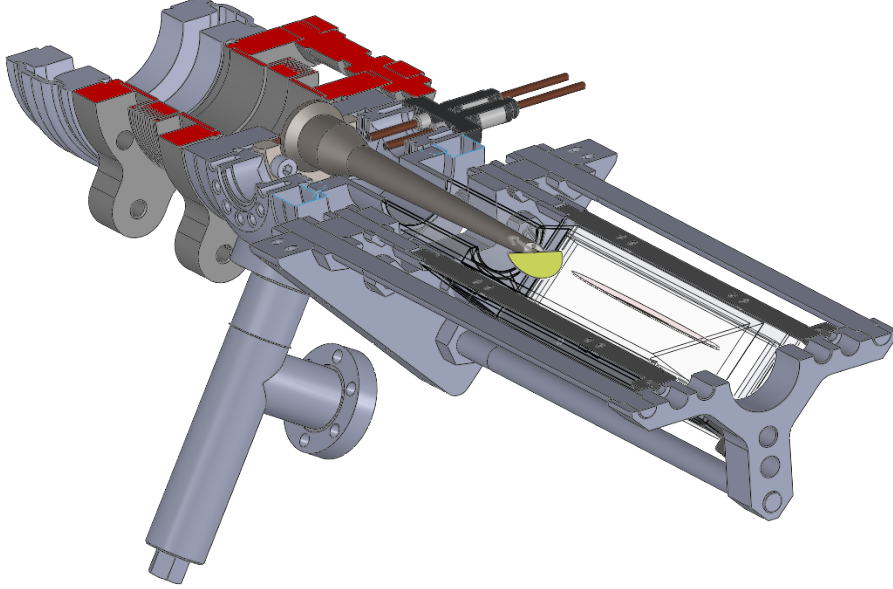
The 2D-MOT vacuum assembly: A cross-section of the 2D-MOT vacuum assembly, showing (from left to right) the gate valve, flexible port aligner, differential pumping tube, hexagon connected to feedthroughs and an angle valve, and the glass cell. In the center of the glass cell is a representation of the atomic cloud.
